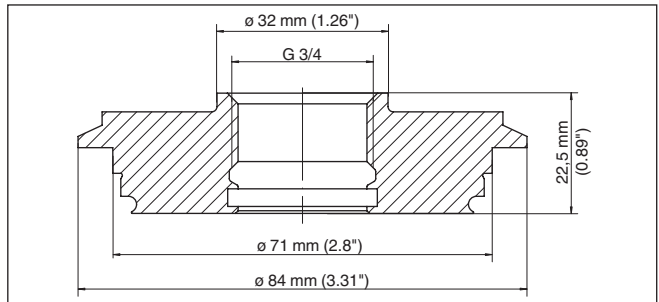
Dimensions adapter G $\frac{3}{4}$  (DIN 3852-X) on Tuchenhagen DN 32
